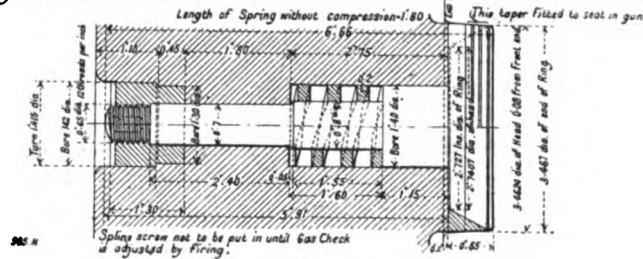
OBTURATOR AND GAS-CHECK RING.
